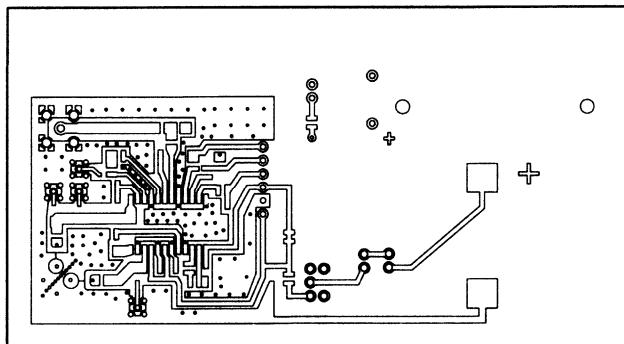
TRF1400 Receiver Test Circuit, Board Layout — Top Side
